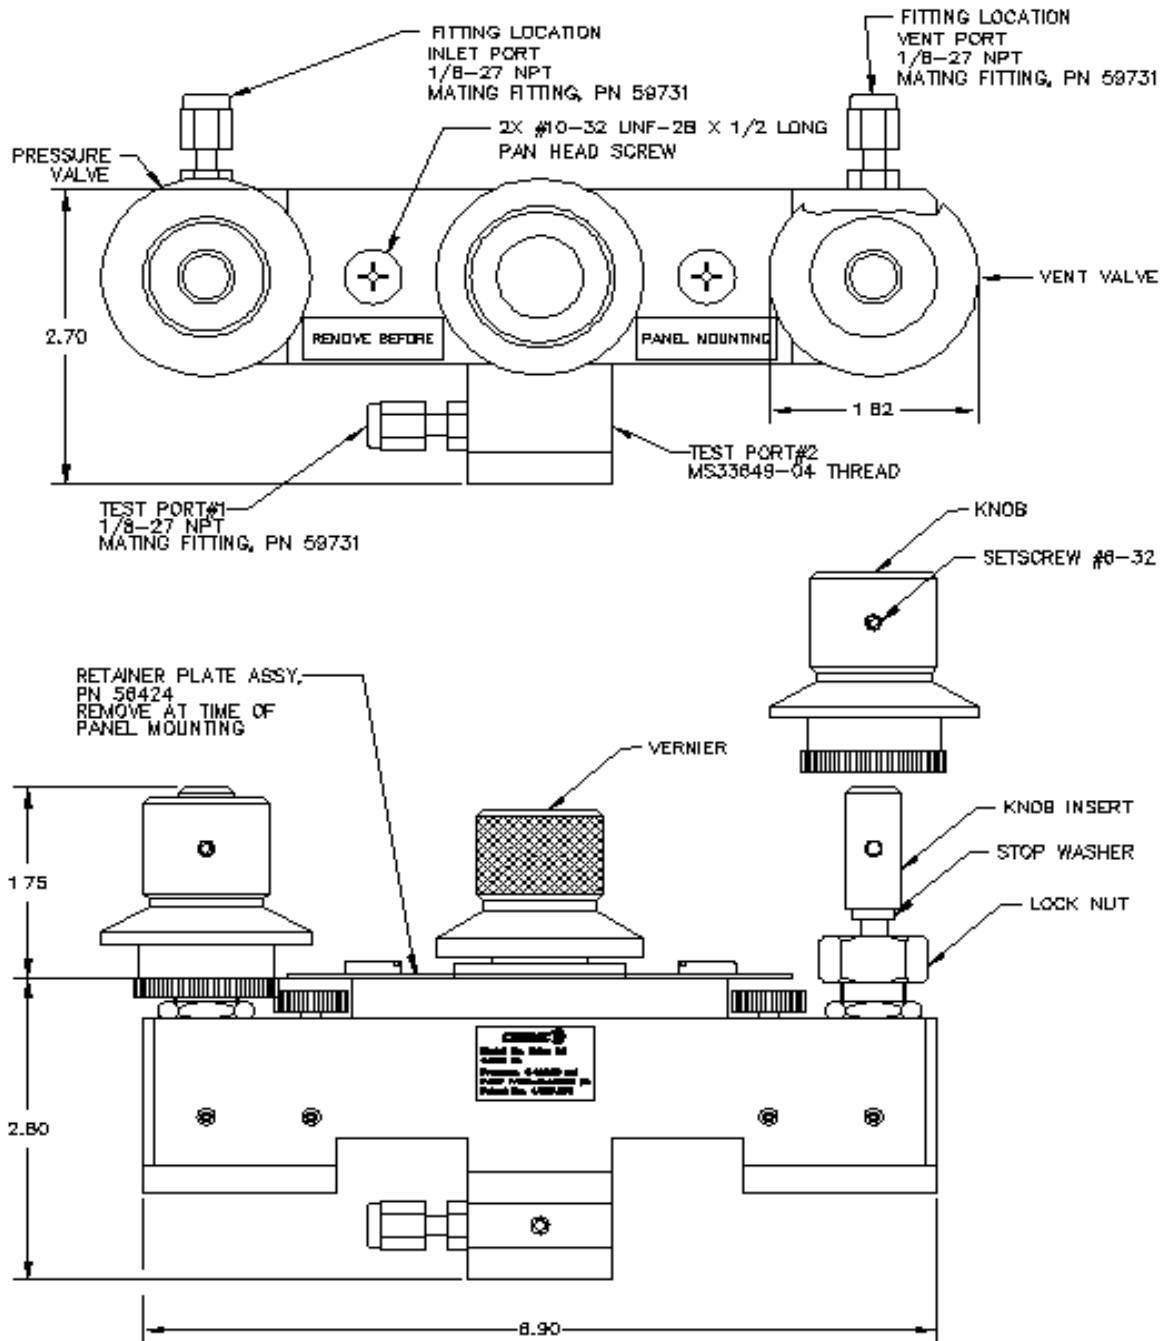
ORION-3A Valve Assembly (PN 55283) Mounting View
